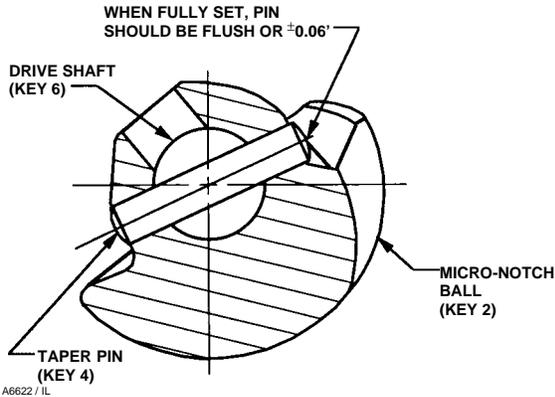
Taper Pin Installation for Design V150, V200, and V300 Size 1-Inch Valves with Micro-Notch Ball Construction
